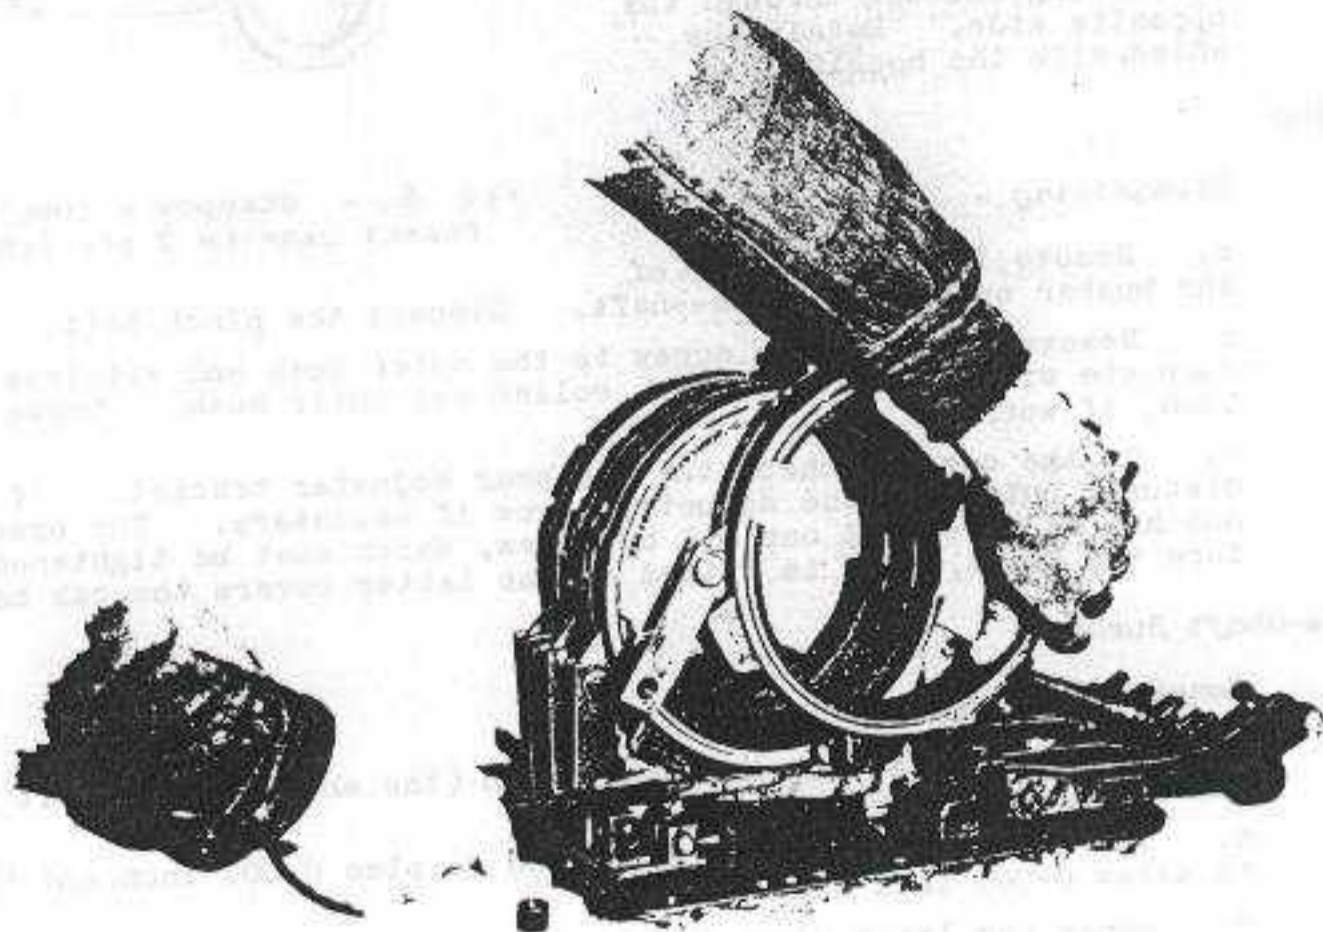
GEARBOX - METHOD OF REPLACING CENTRALIZING SPRINGS IN THE BRAKE BAND LUGS
